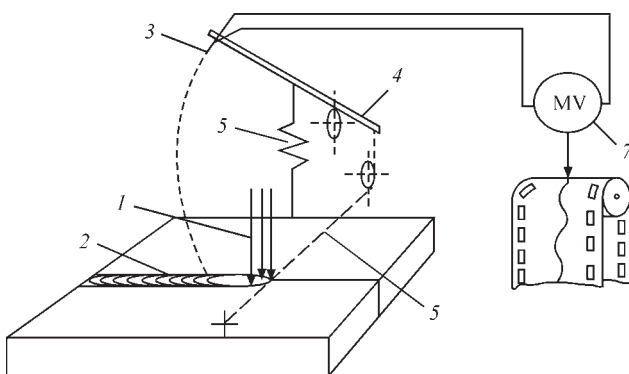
Scheme of measuring temperature of weld pool metal: 1 — electron beam; 2 — weld; 3 — thermocouple; 4 — balancing lever; 5 — holding wire; 6 — spring; 7 — self-recording device
